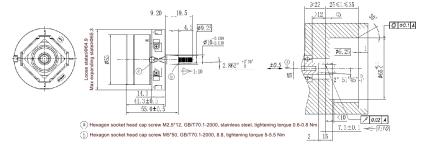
Mounting dimensions Figure 3-2 Recommended traction machine dimensions for the encoder
